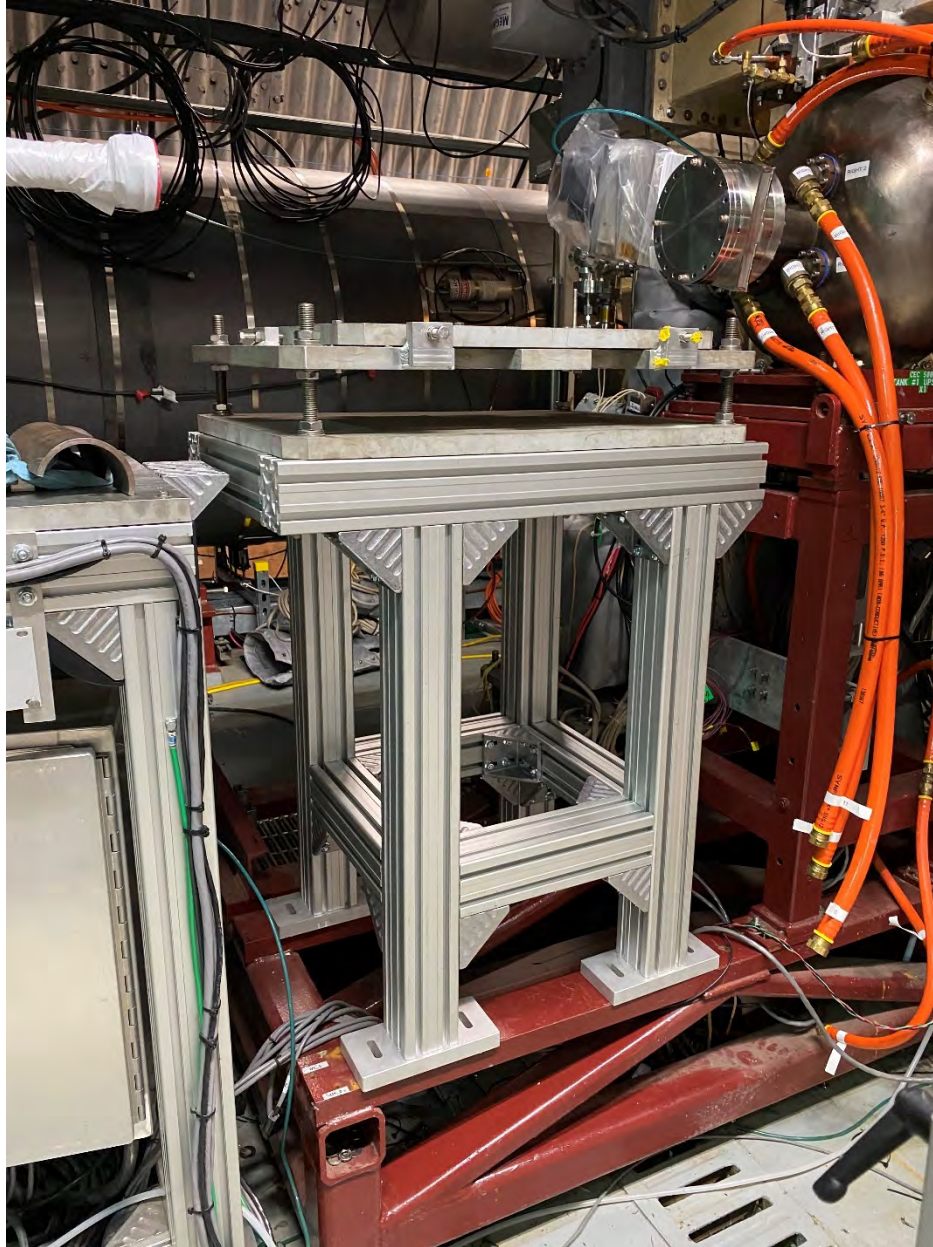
New DCCT Mounting Stand, Fabricated and Installed
